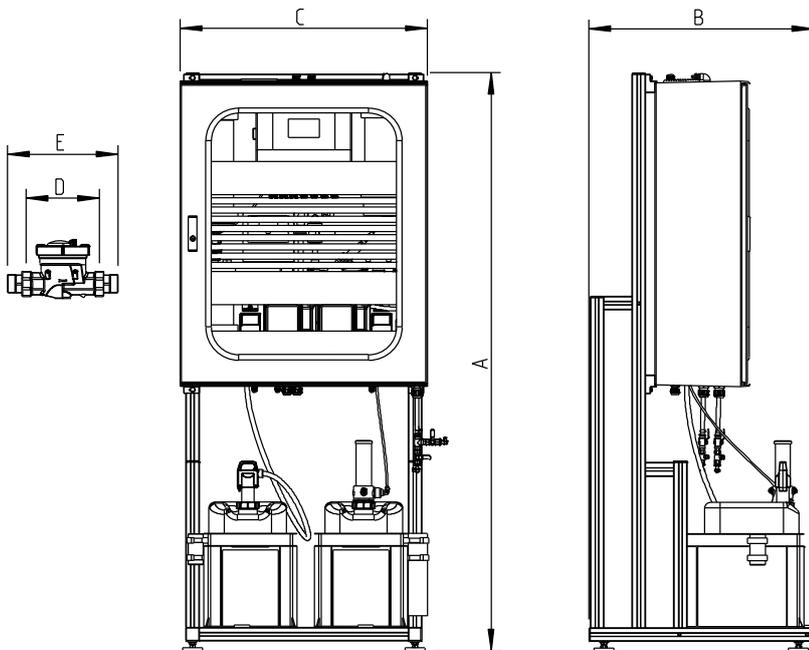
Dimensional drawing of GENO-Bakttox MRX/RX
